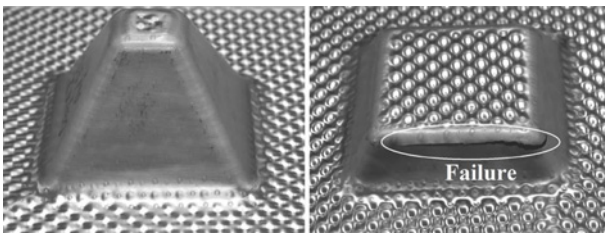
(a) Deformed shapes of the embossed specimen for the cone angles $\theta = 62^\circ$ (safe formed, left) and 64° (failure occurred, right) in the case of an inward movement tool path
